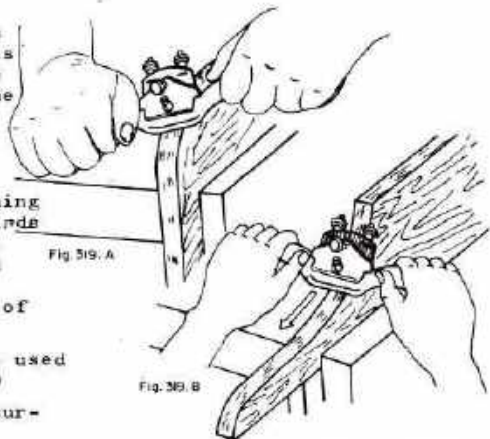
A & B SMOOTHING A CURVED EDGE WITH THE SPOKESHAVE
